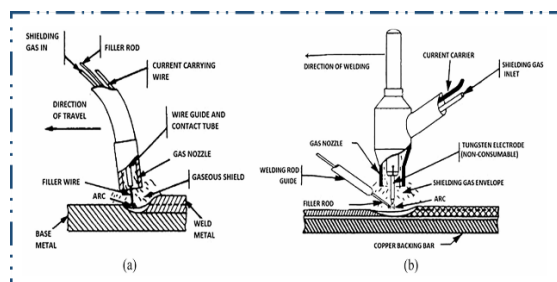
(a) Gas metal arc welding and (b) gas tungsten arc welding [23].
